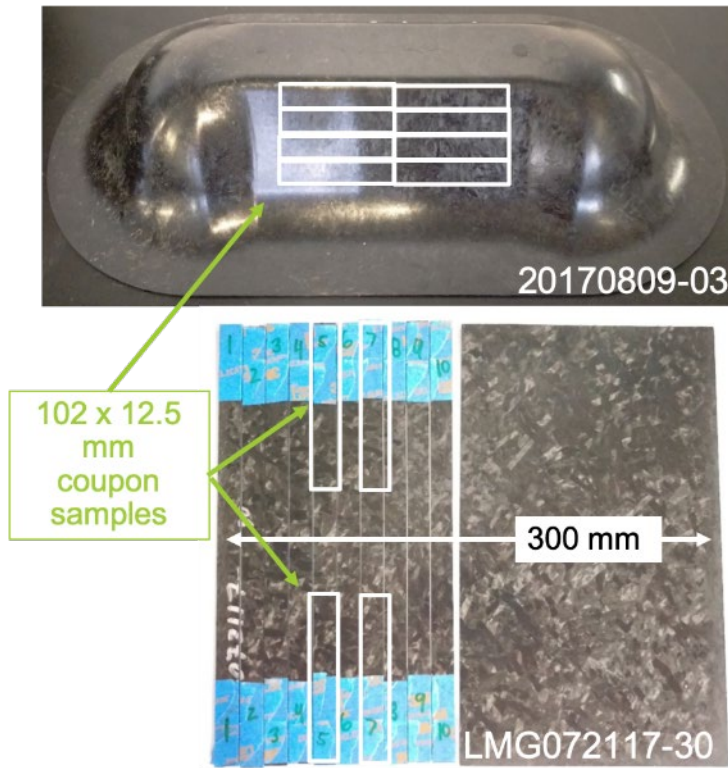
Example of extraction of 100-by-12.5-mm (50-by-12.5-mm gage) tensile sample from double dome (top) and flat plaque (bottom) molded part.
